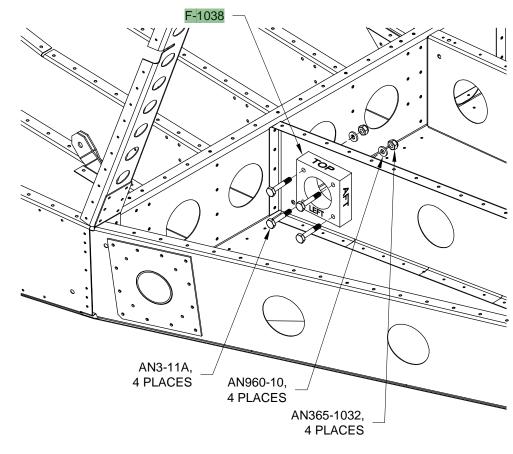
ATTACHING THE SUPPORT BLOCK
